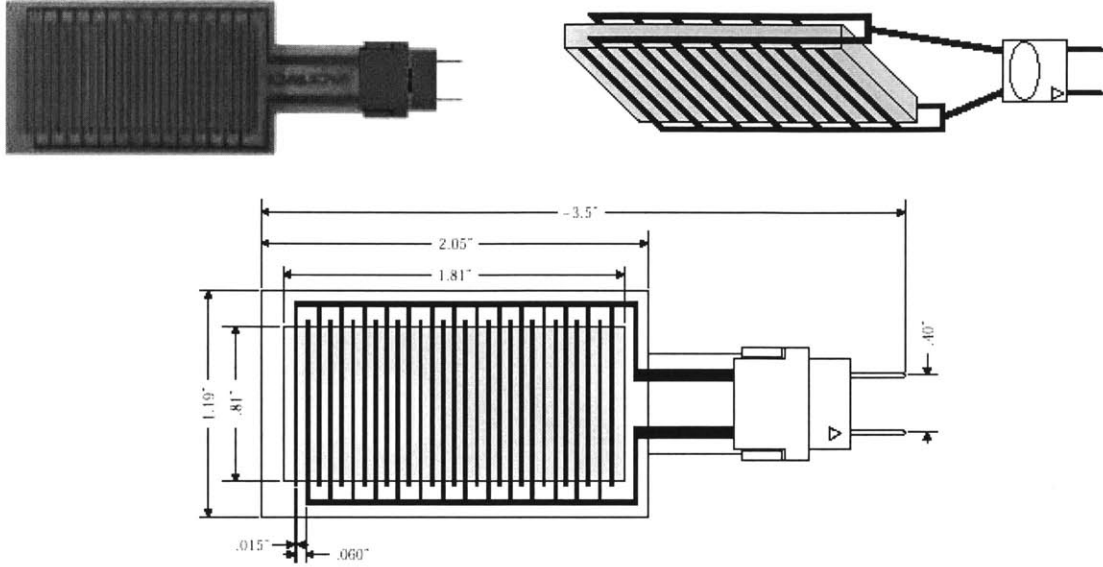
QuickPack IDE Strain Actuator (Dimensions in inches)
